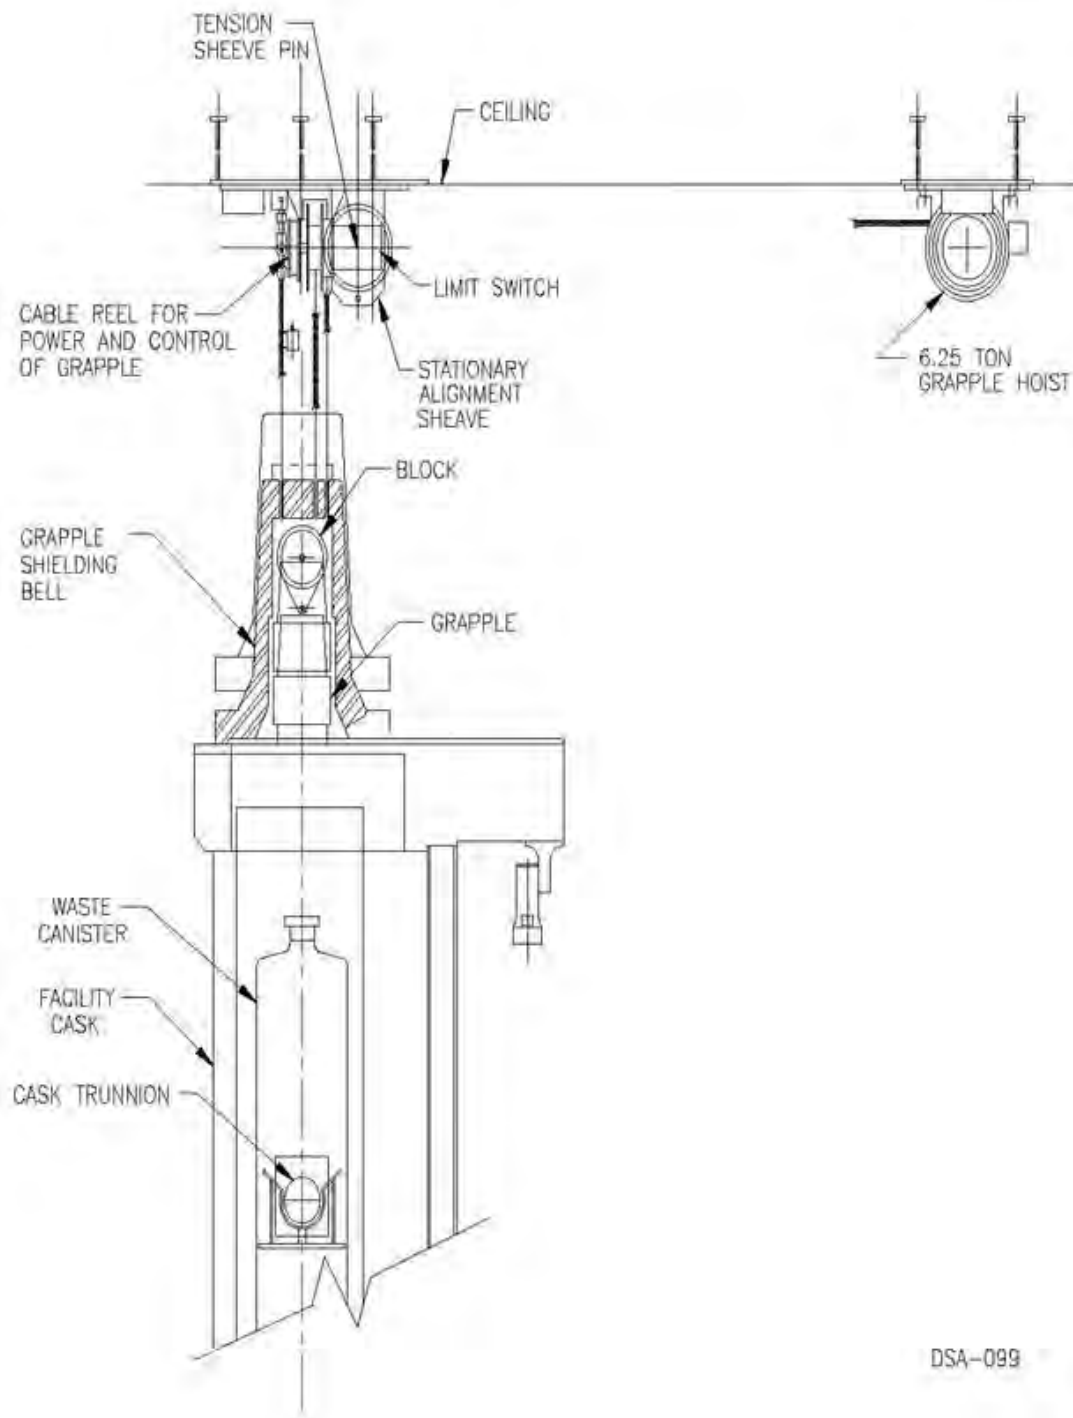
6.25-ton Facility Cask Loading Room Grapple Hoist
